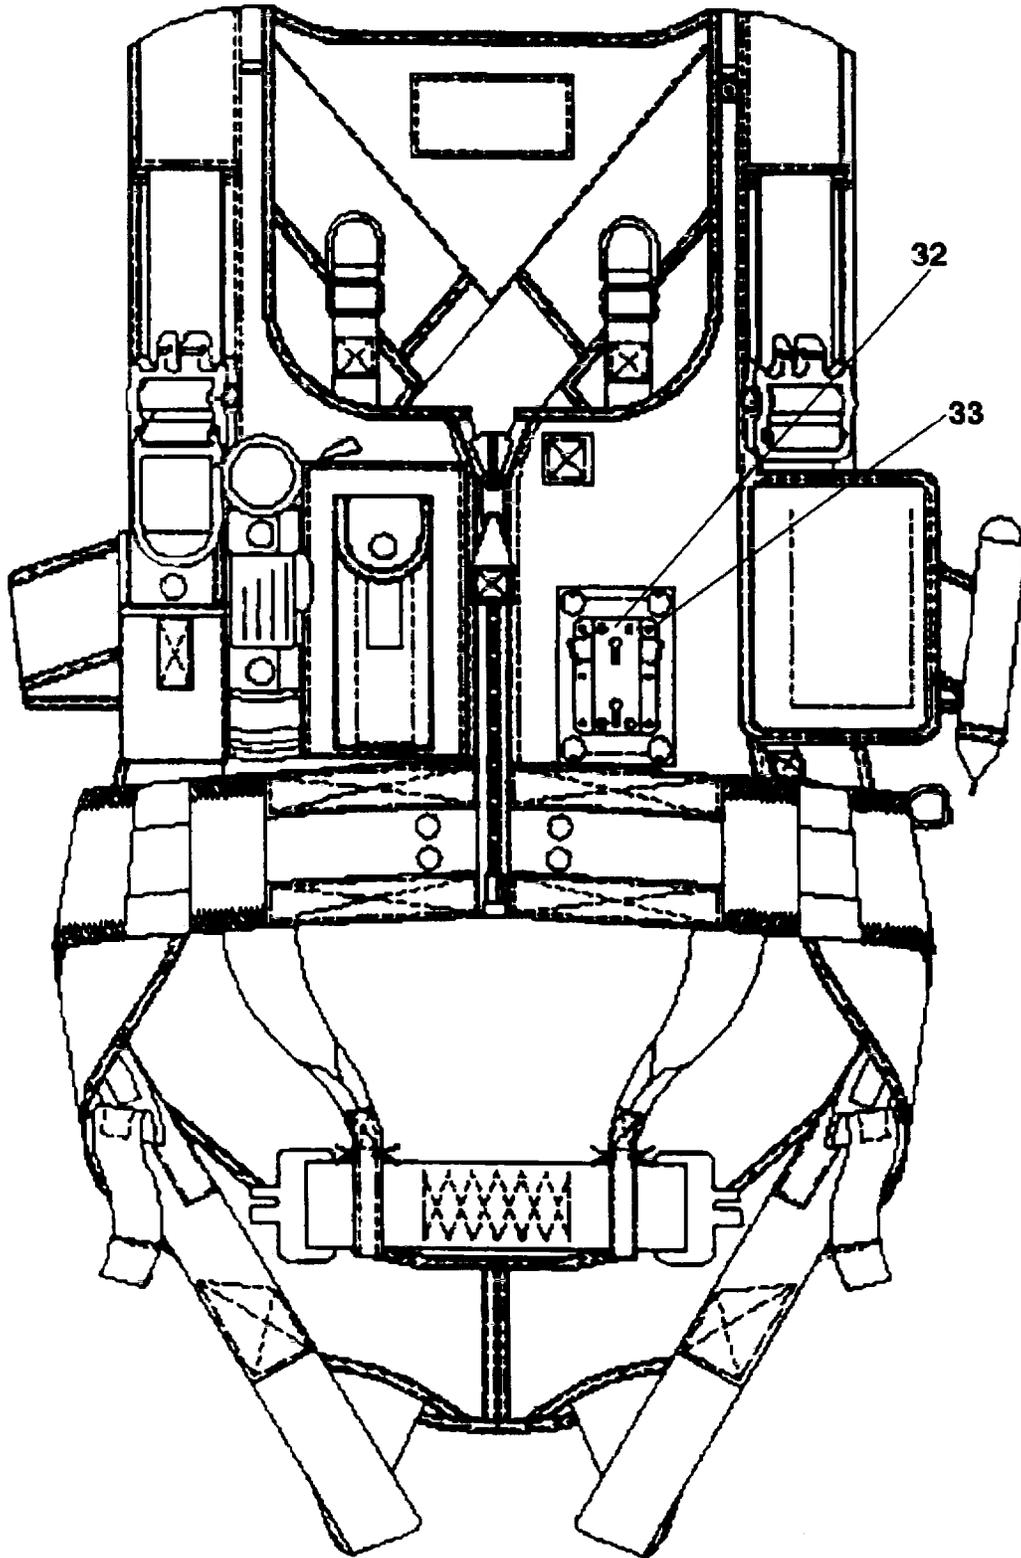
PCU-33/P Parachute Restraint Harness Assembly (Sheet 7 of 11)
